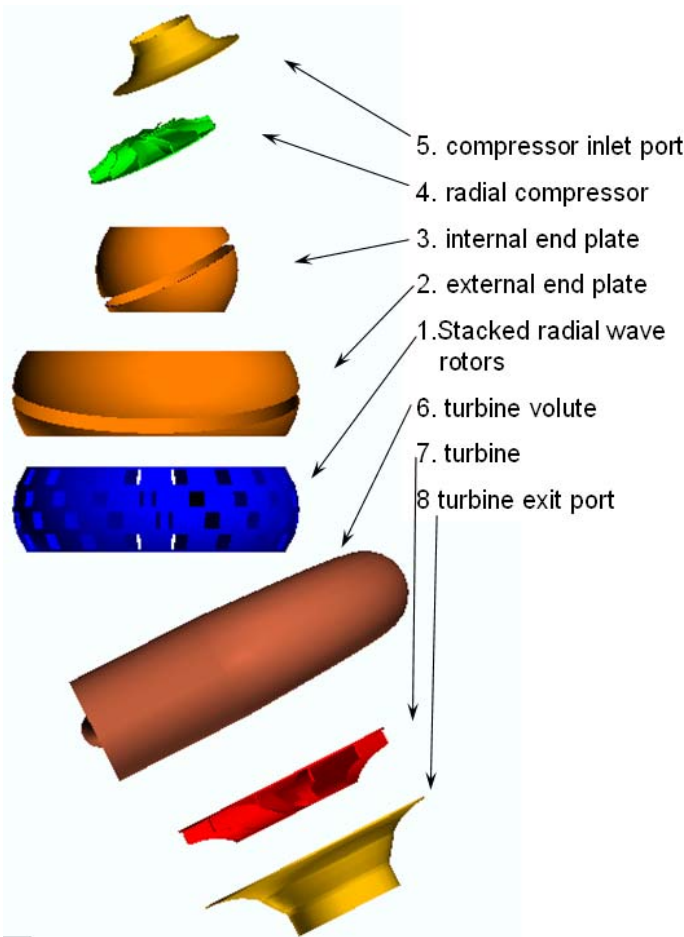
Component parts of a radial wave rotor topping a gas turbine
